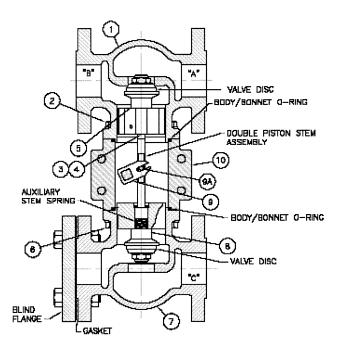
3 Way "ORS" Piston & Stem Assembly
